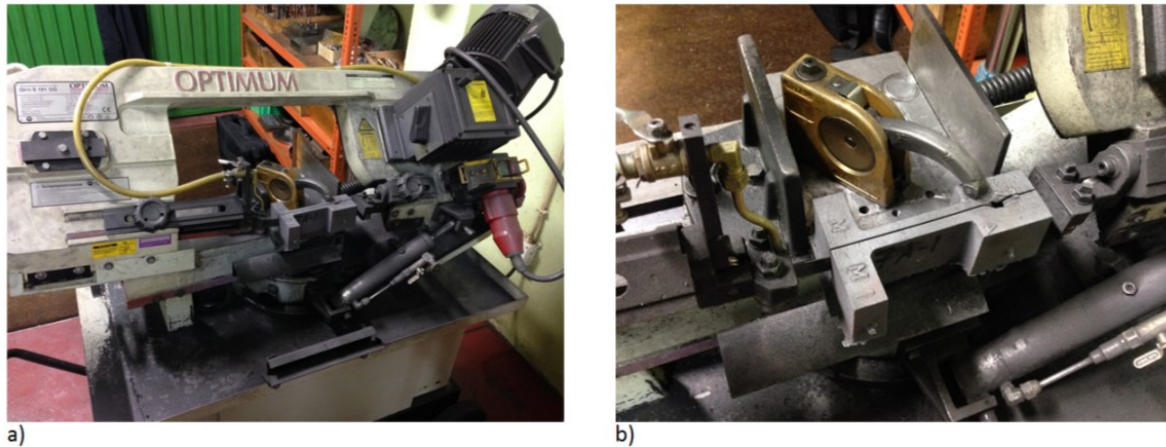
Apparatus for the cut of the test casting. a) Test casting being cut in the horizontal semi-automatic band saw; b) Details showing the casting cut position.
